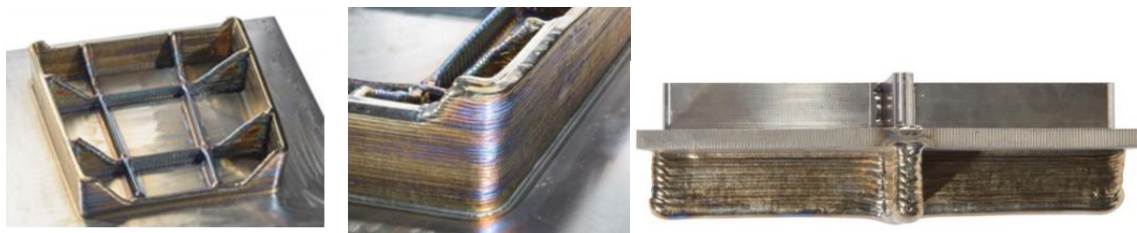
20 kg landing gear rib built in titanium and the detail of the surface finish. Small part as deposited and machined. [6]
